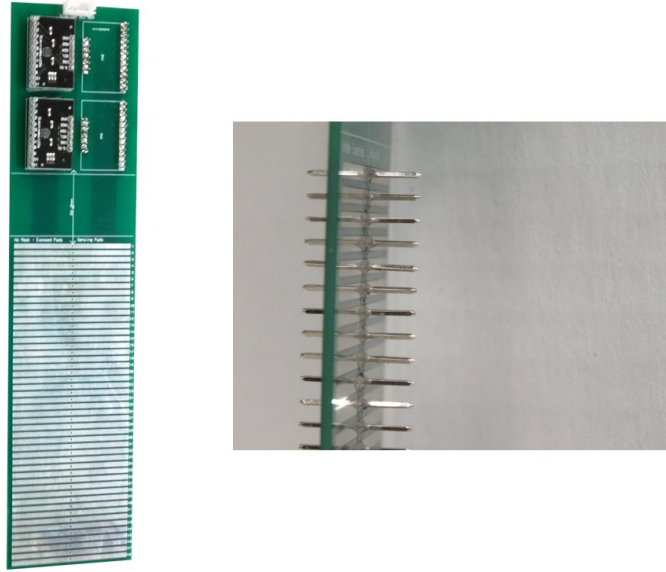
Implemented sensor unit. Left: Sensor PCB. Right: Pins
